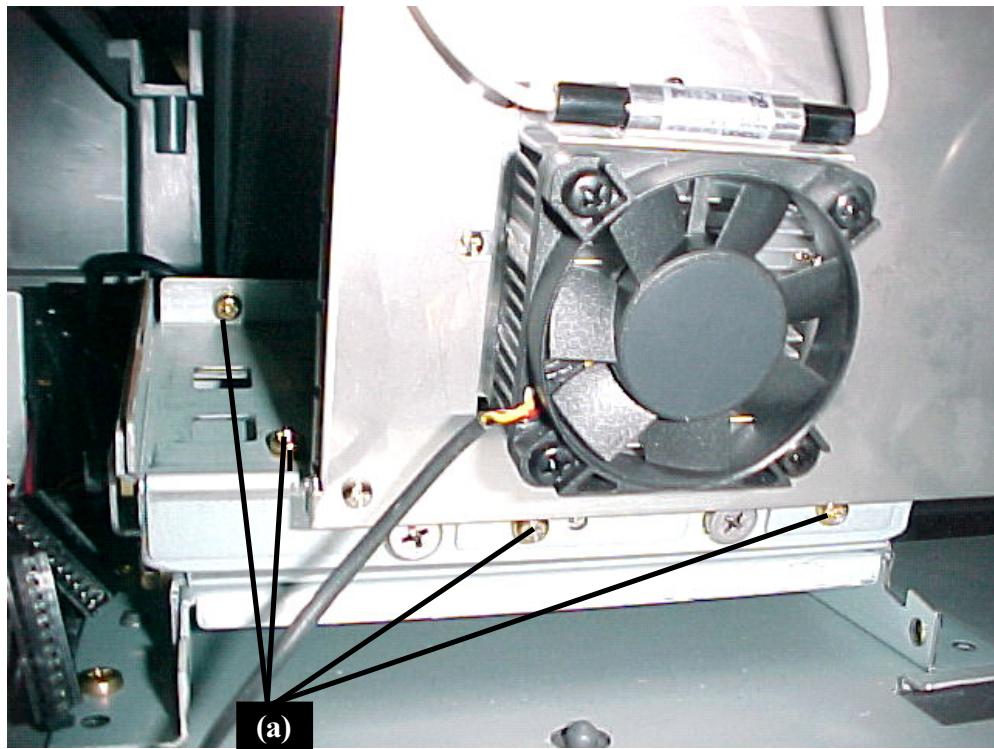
Light Engine (Rear View) Airduct & Fan Cover Removed
